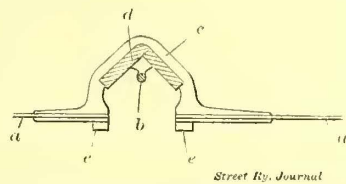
ELEVATION OF CROSS OVER BRACKET
